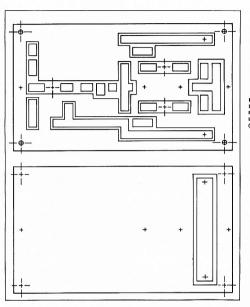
Double-Sided Printed Circuit Board Lavout (actual size).
